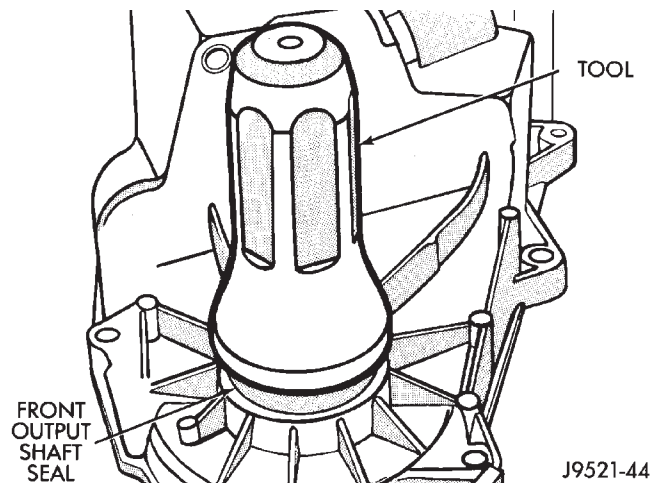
Starting Front Output Shaft Seal Into Case Bore
